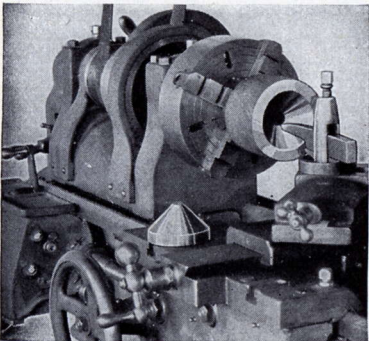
Machining a Conical Die in the Lathe, Compound Rest Set at 30 Degree Angle
